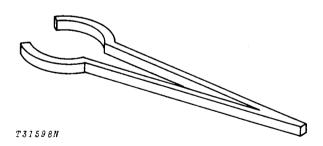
Injection Pump Drive Shaft Seal Installing Tool
